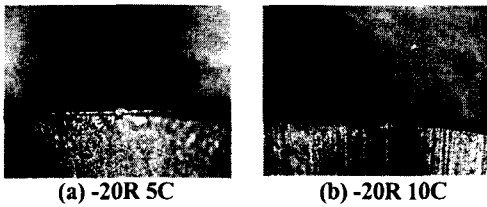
Illustration of Tool Wear in Ball EndMill $\phi 6$ with Different Tool Geometry
